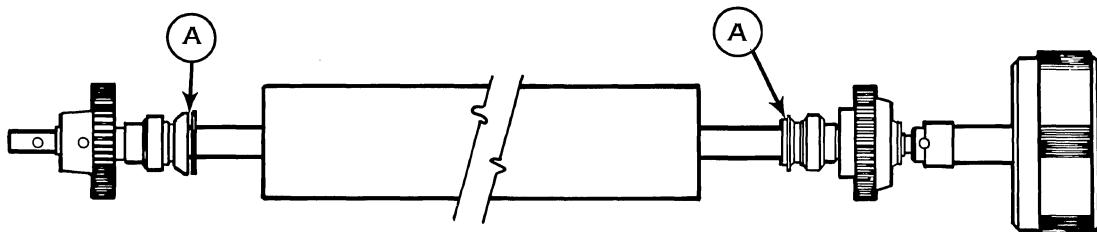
EARLY STYLE PLATEN SYSTEM LUBRICATION POINTS
